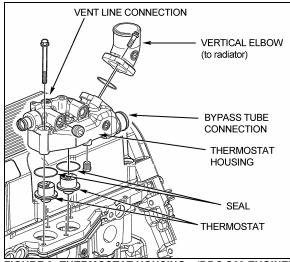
THERMOSTAT HOUSING (DDC S60 ENGINE)
